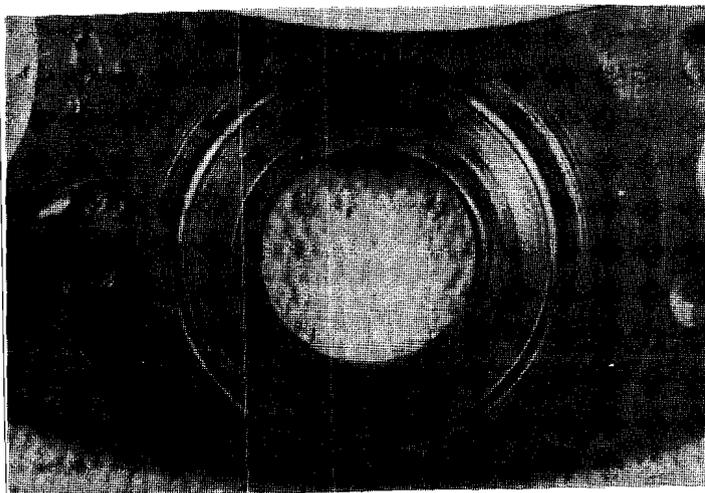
Carrier Plate at a Position where Thrust Washer was Cut Through
